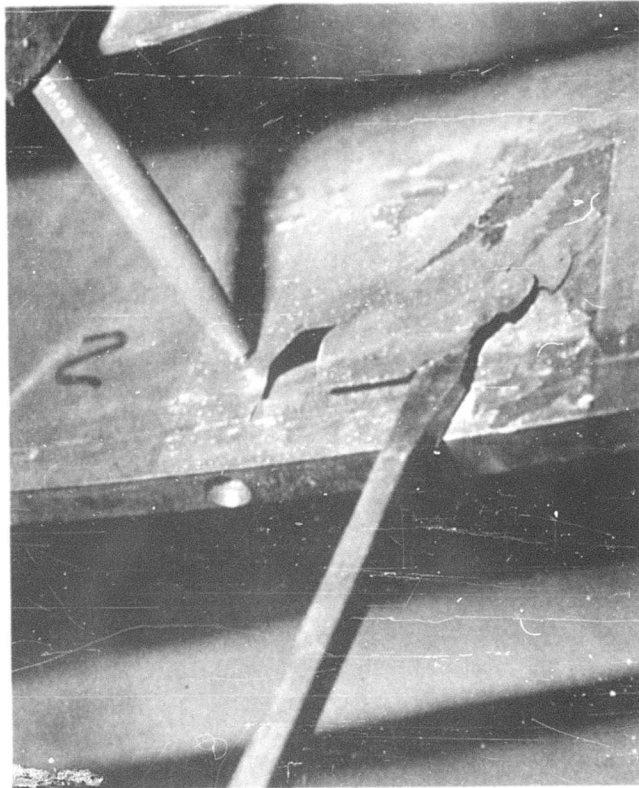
FRONT FRAME SKIN FAILURE (S/N002)
